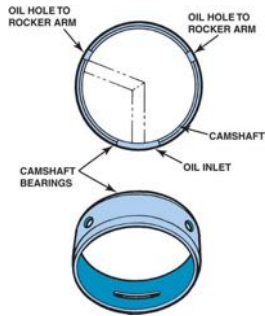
Cam-in-block engines support the camshaft with sleeve-type bearings.
